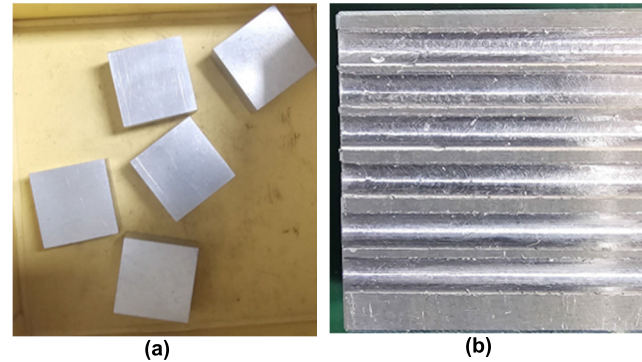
Workpieces for data collection: (a) Unprocessed; (b) Processed workpiece.
